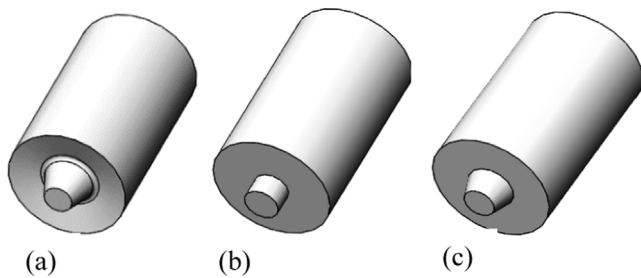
Tool geometries (a) Concave, taper probe (b) Flat, cylindrical probe and (d) Flat, taper probe.
